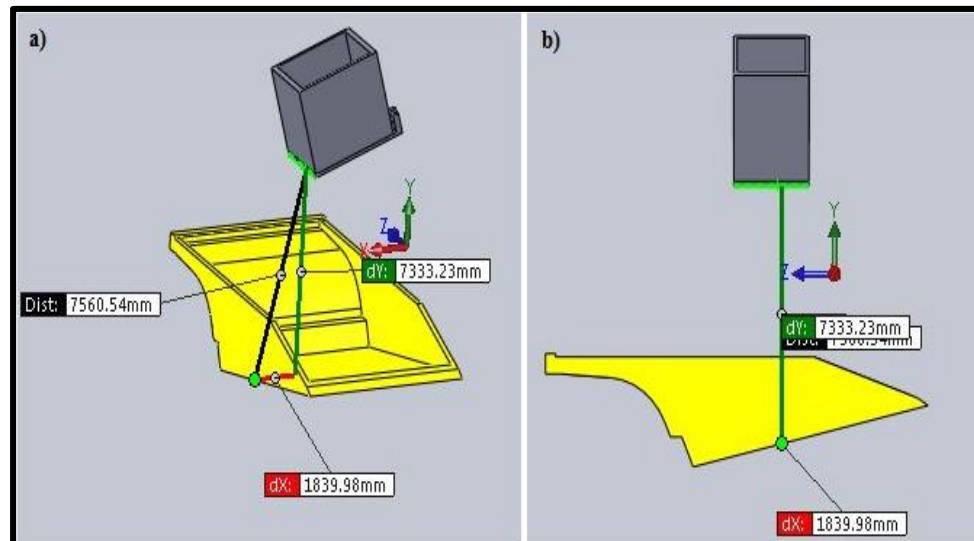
Truck Body and Shovel Dipper CAD Assembly for $H_t = 7.33$ m (7333 mm):
